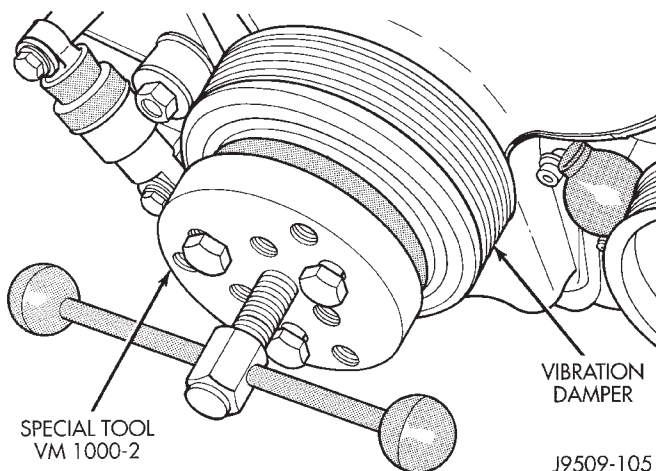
Vibration Damper Removal With Tool VM-1000-2
